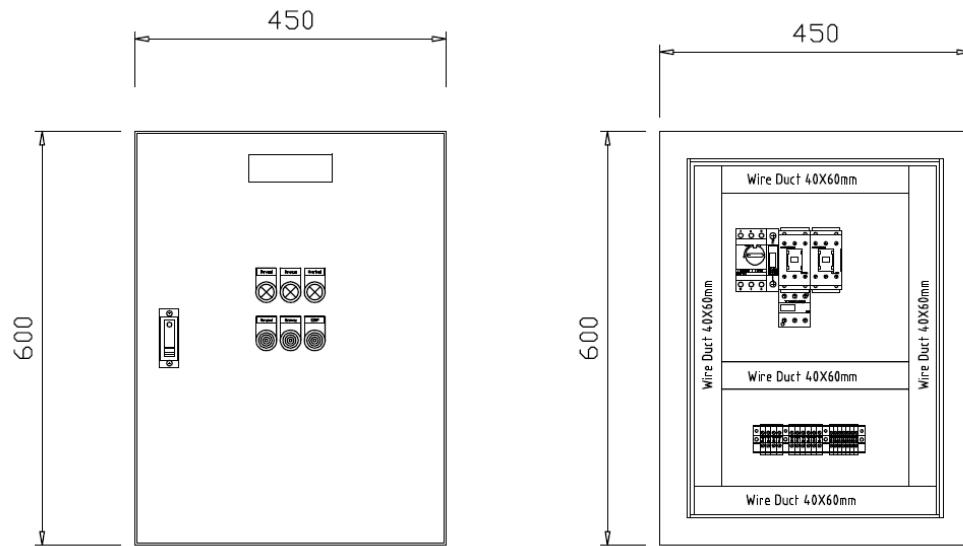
Front views and w/o front cover of Forward-Reverse motor.
